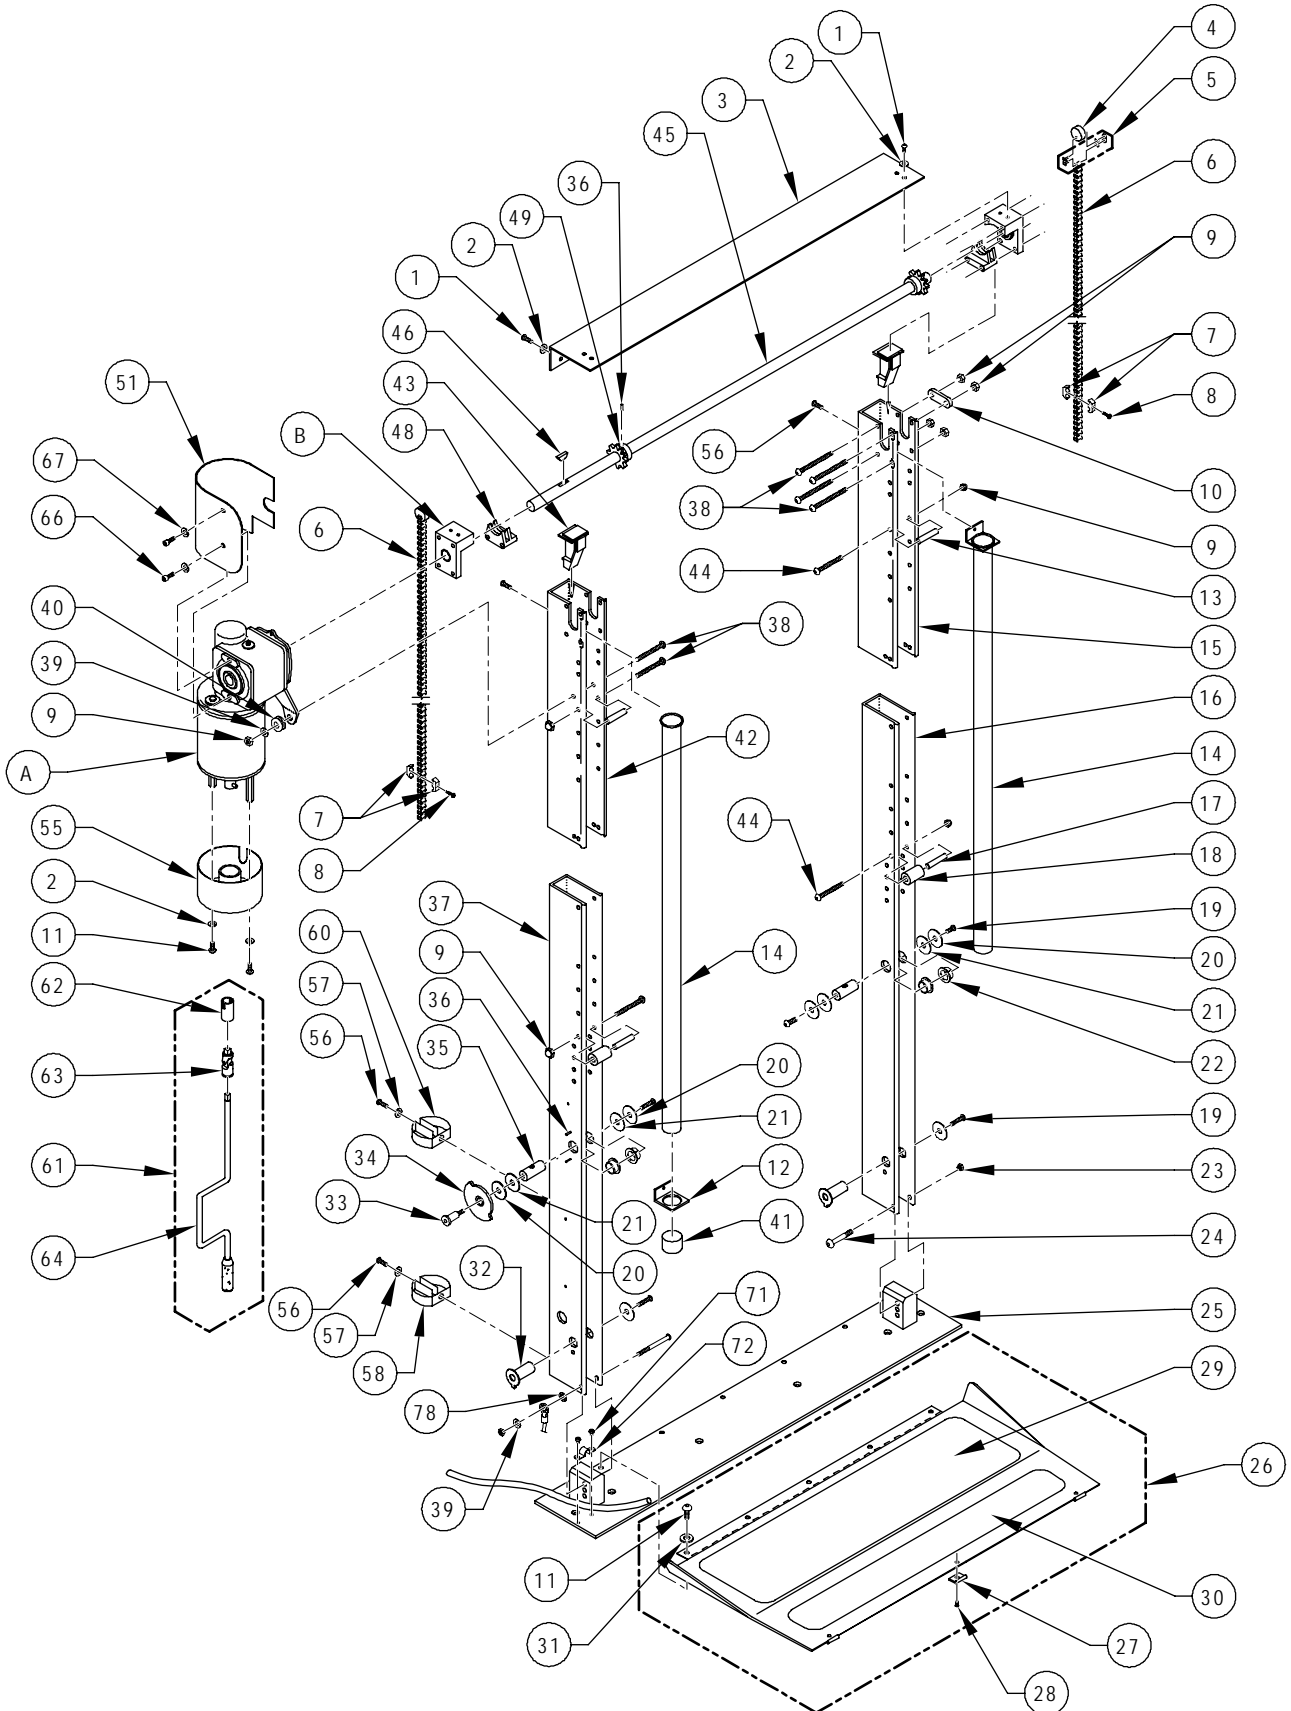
UNI-LITE BASE ASSEMBLY (SHEET 1 OF 2)
